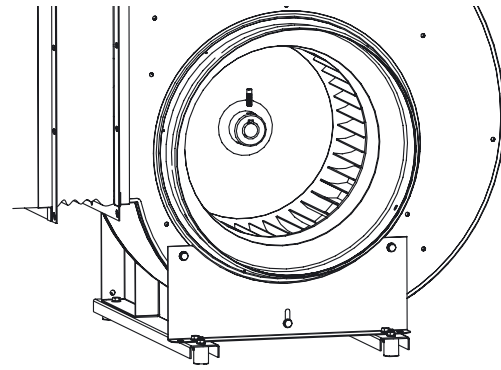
GTLF-1-020...050 Remove the hub securing and the impeller from the motor shaft.
